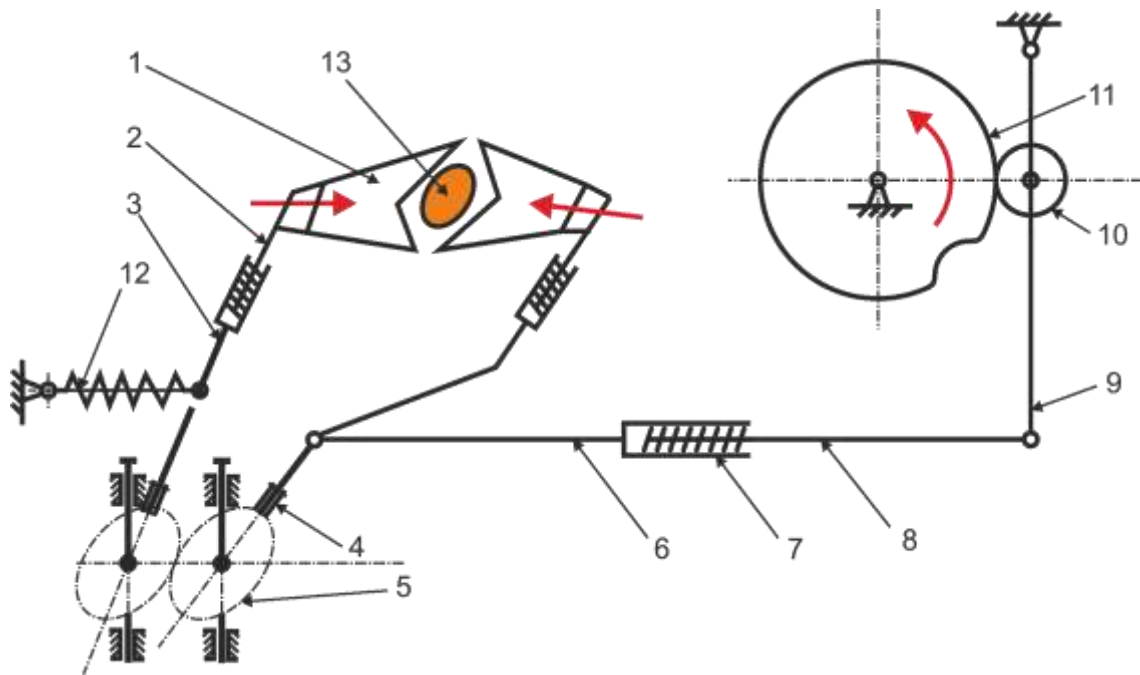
Simplified kinematic diagram of lever shears with cam drive: 1 - knife 2 - arm, 3 - lever, 4 - arm holder, 5 - gearing, 6 - rod, 7 - adjusting clutch, 8 - rod, 9 - lever, 10 - roller, 11 - cam, 12 - spring, 13 - a gob of glass melt
